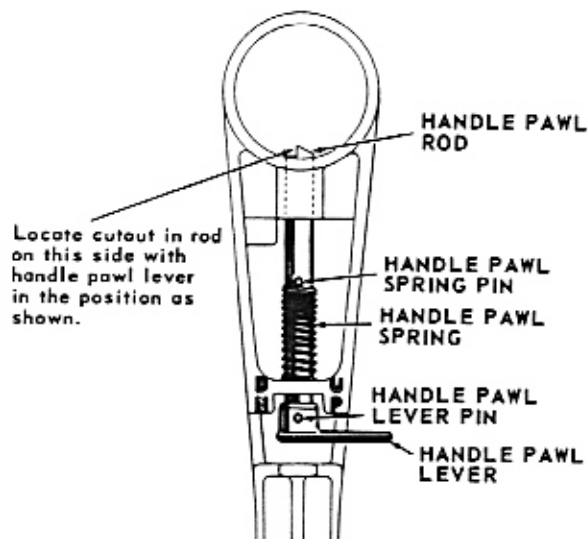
LEVER AND ROD ASSEMBLY
